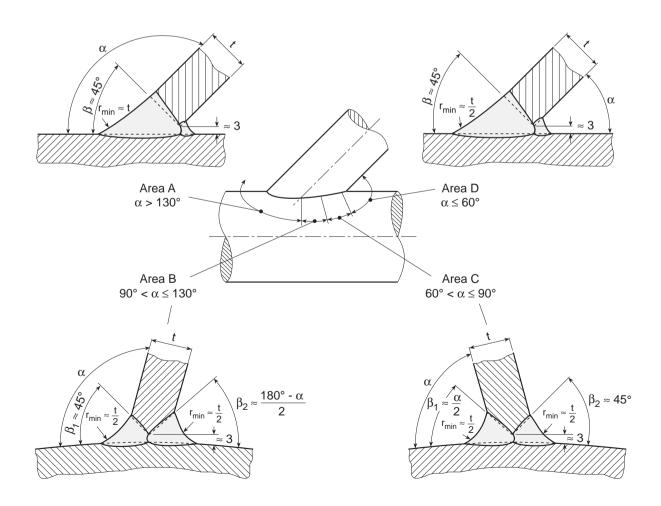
Typical tubular weld connections with back welding
